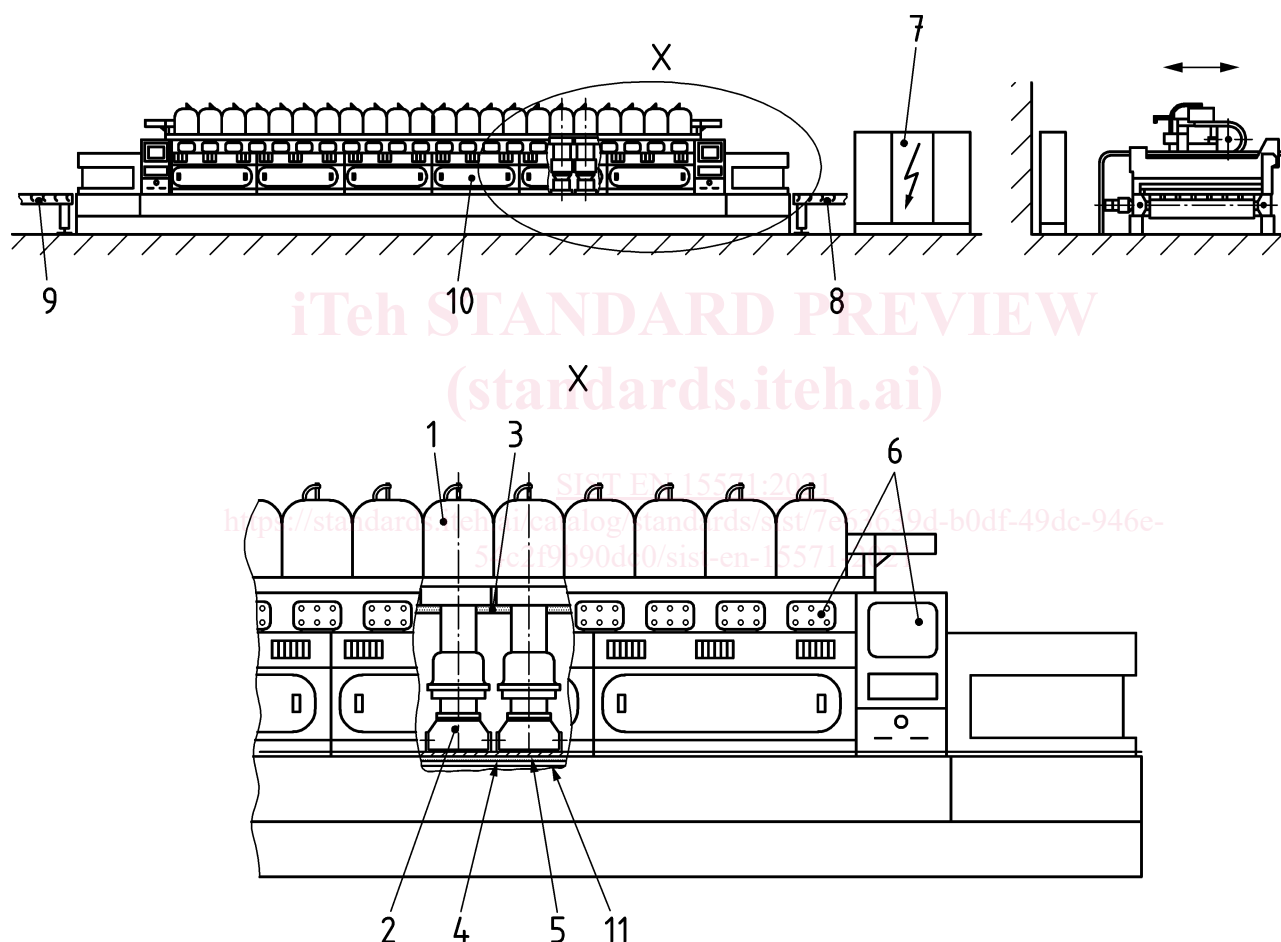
Example of a surface-finishing machine with fixed table and mobile transversal bridge "SEMI-PORTAL"
